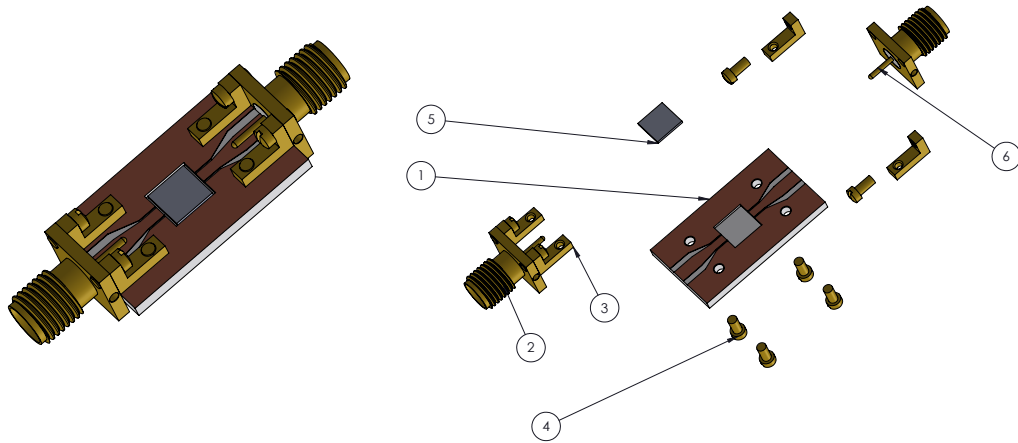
CAD drawing of CB, assembled and exploded views.. Two modified brass SMA connectors are affixed by brass brackets. The superconducting coplanar waveguide resonator is located in the center of the circuit board. ① the circuit board (copper clad ceramic, Rogers Corp., R04350B), drilled to accept the bracket connectors; ② the modified brass SMA connector; ③ the brass bracket used to affix the SMA connector to the CB; ④ the brass screw used to connect the circuit board to the bracket; ⑤ the superconducting (niobium) thin-film resonator; ⑥ the central conducting pin of the SMA connector, which rests on top of CB's central conducting strip (a small piece of indium metal is held between the two for electrical contact).
